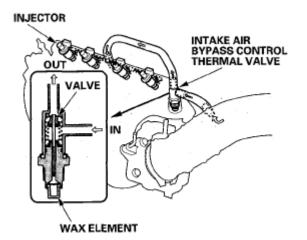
Identifying Intake Air Bypass Control Thermal Valve Courtesy of AMERICAN HONDA MOTOR CO., INC.
